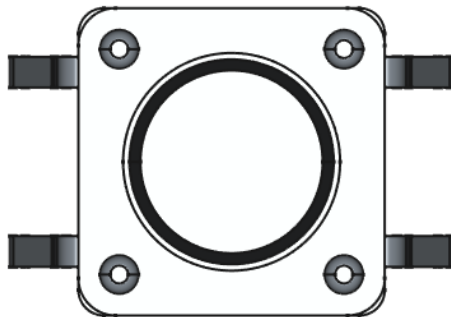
Right View of Push Button(Produced using FreeCADweb)
